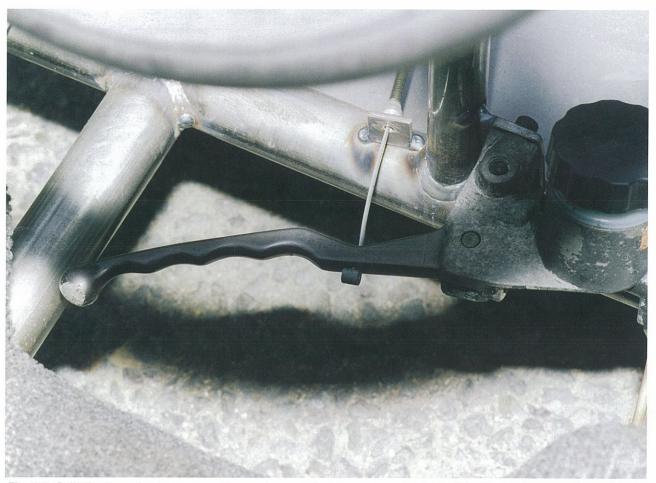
Drill the hand-brake lever on the motorcycle brake master cylinder to take the brake operating cable. I left the handle in place for emergency operation of the brake. (Steve Williams)
